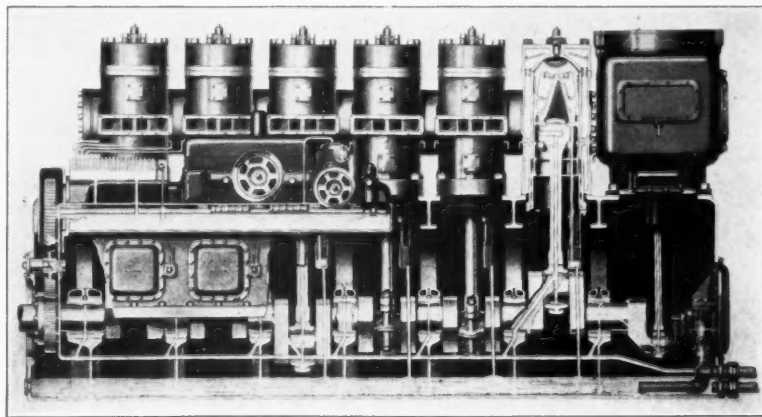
Longitudinal section through a Fairbanks Morse Diesel Engine, illustrating pressure circulating system for lubricating and cooling the oil.
